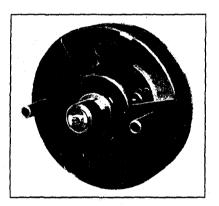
Brake Adjusting Drum 49839 With Adapting Sleeve 87981 for Front Wheel Brakes
